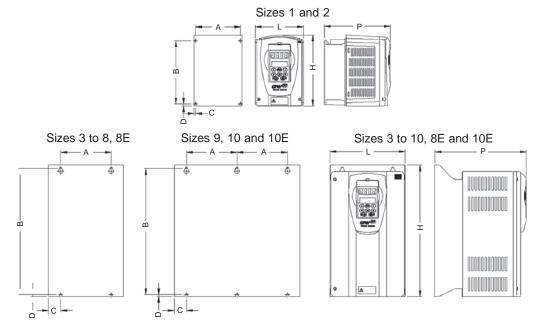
Mounting Dimensional Drawings of CFW-09
